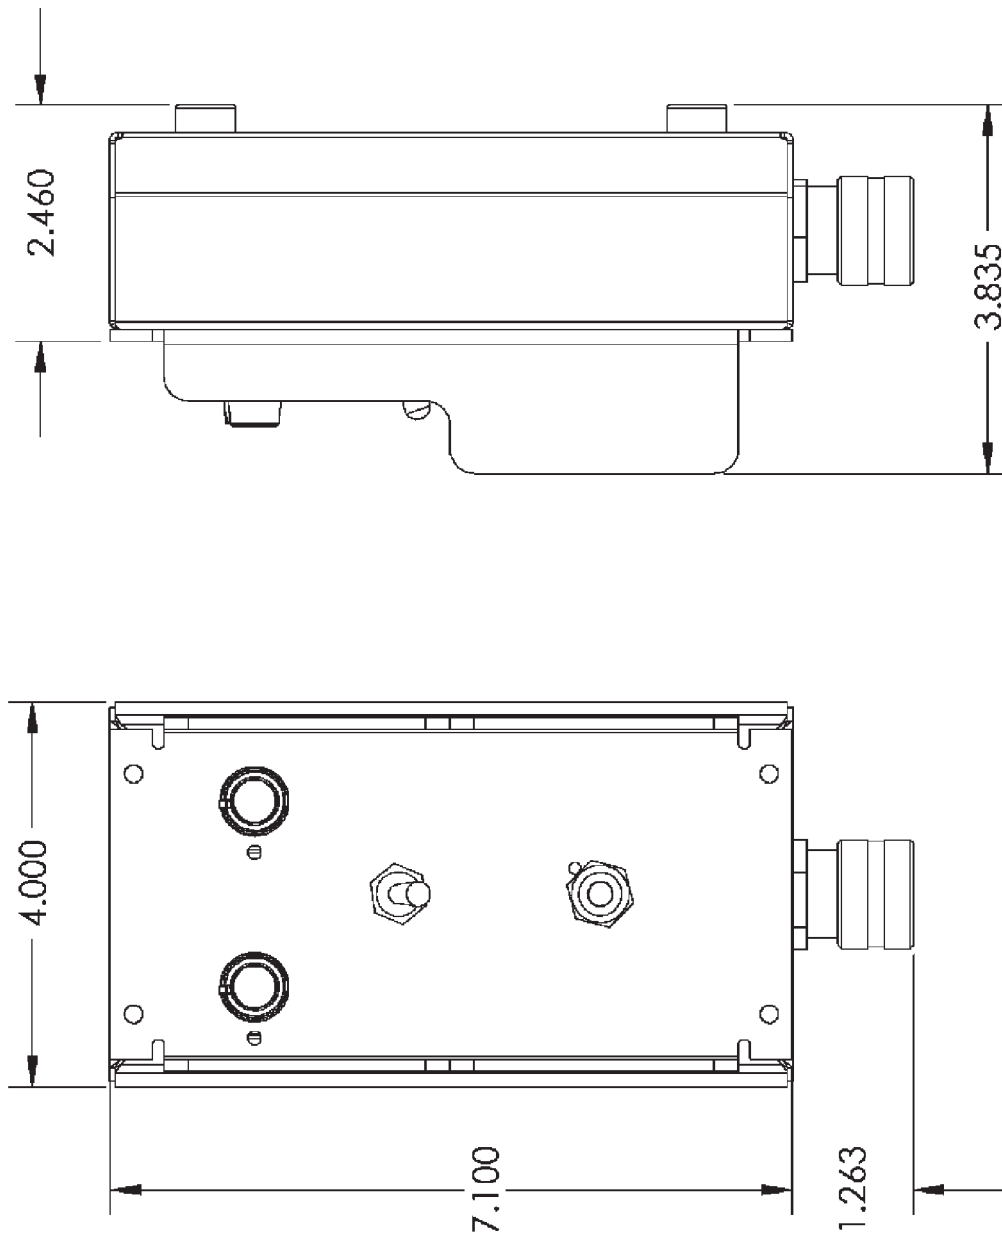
CONTROL UNIT MOUNTING DIMENSIONS
